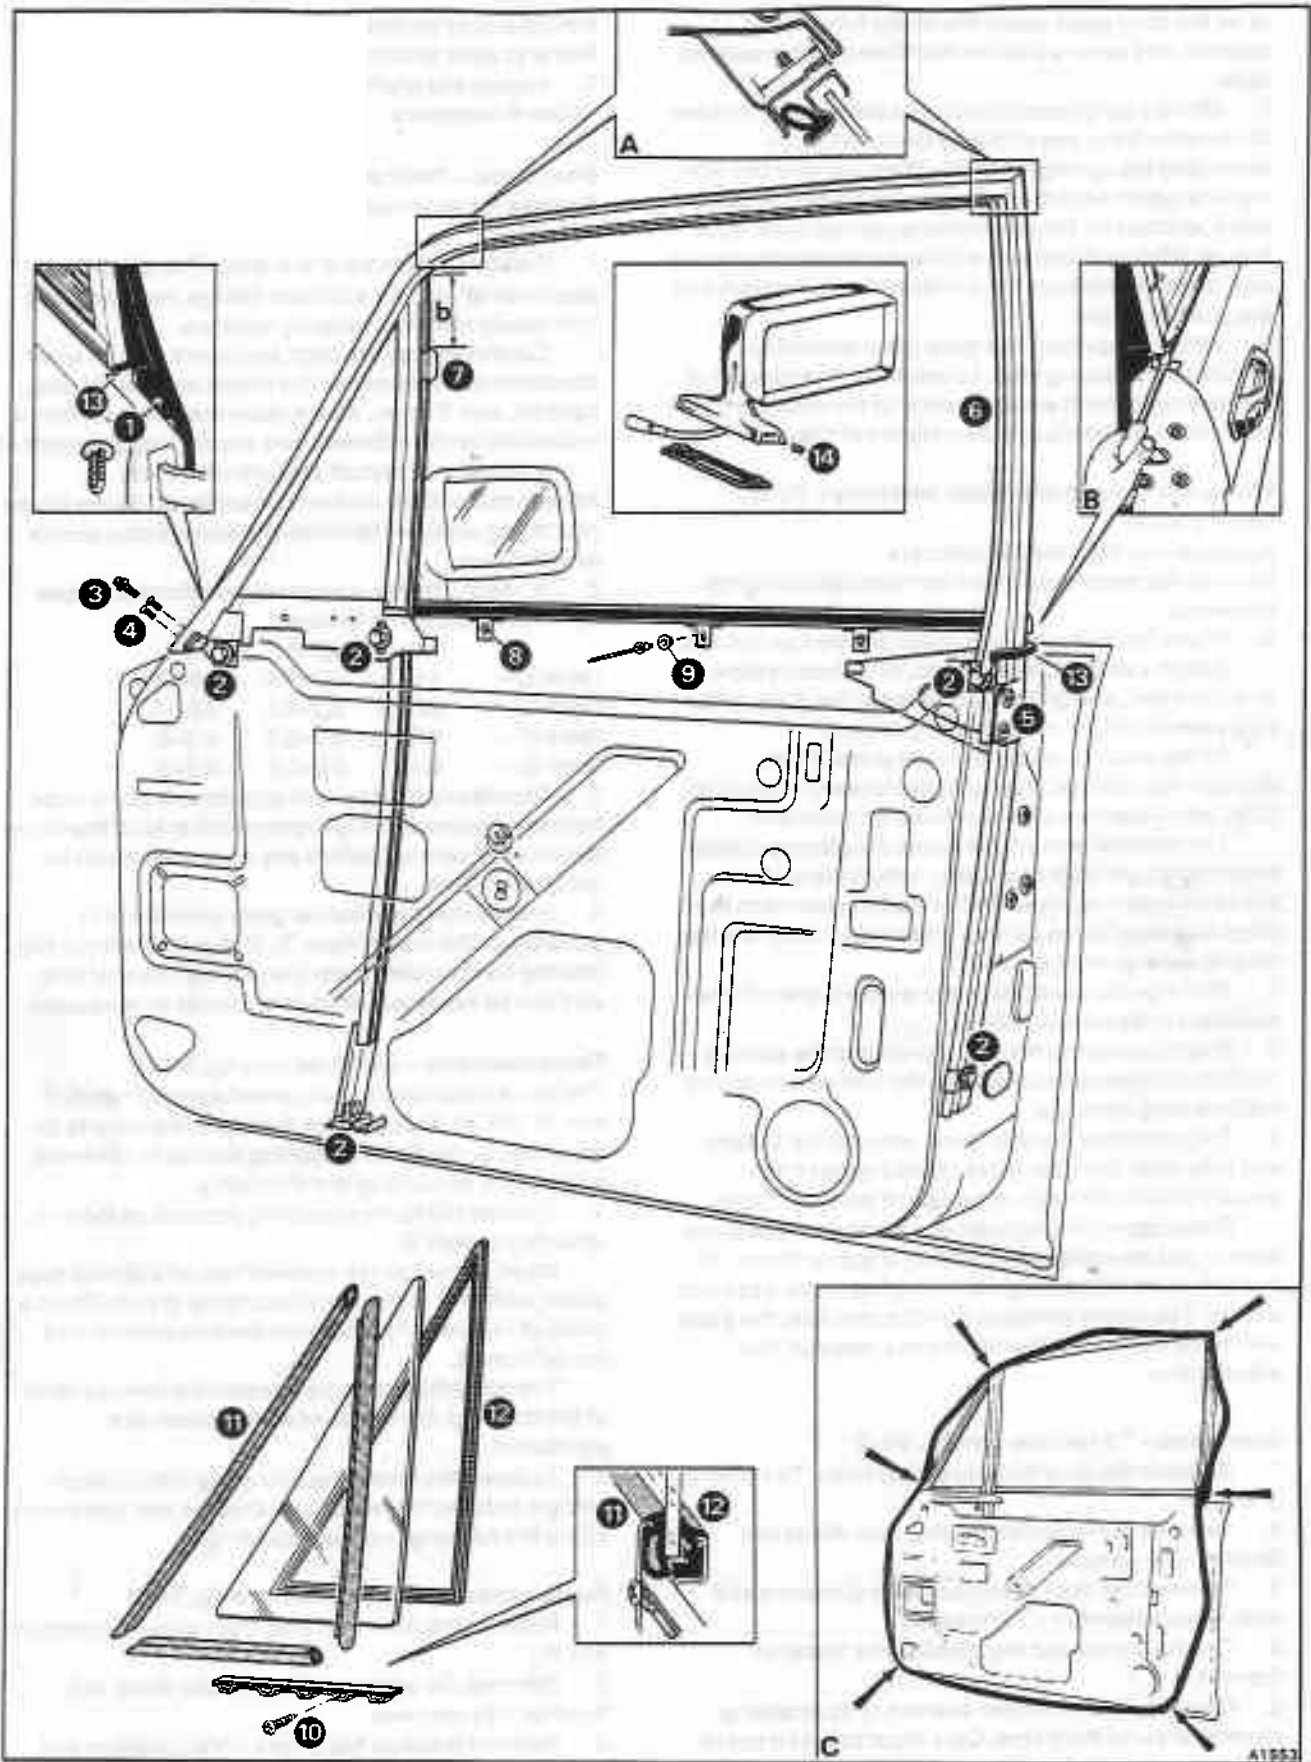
Door frame, door to body seal, quarter glass sealing arrangement, and fittings
